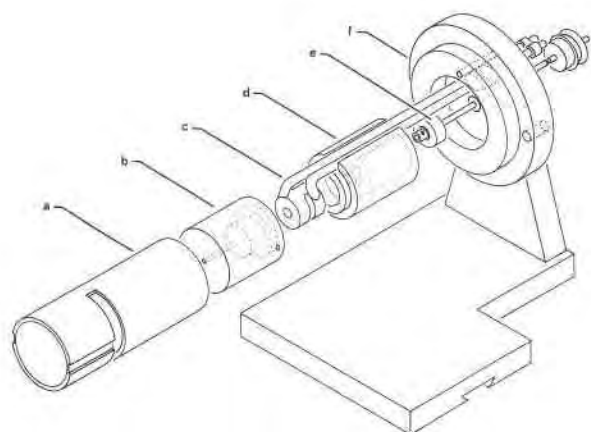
Exploded view of the low-temperature assembly and its mounting: (a) nylon retaining shell; (b) distal part of foam insulation; (c) copper cooling capsule; (d) proximal part of foam insulation; (e) sample-centering chuck; (f) machined nylon disk for mounting assembled cooling unit and cassette.
